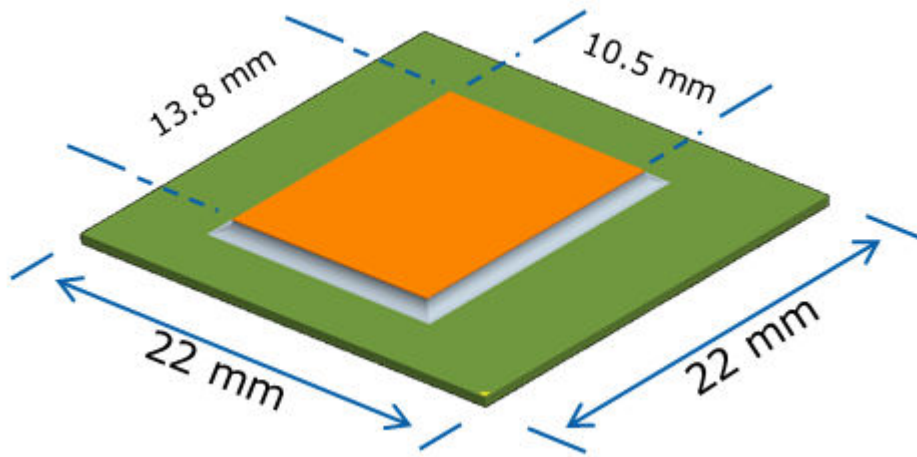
Package Test Vehicle Model and Dimensional Overview
